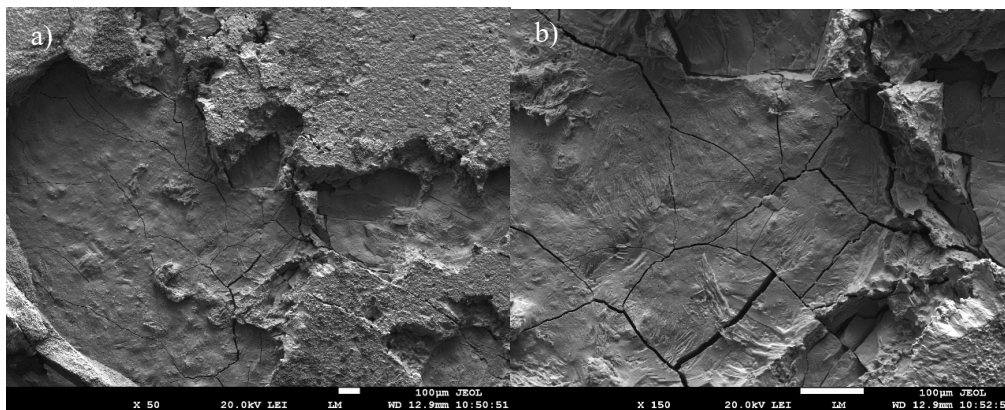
Fractured surface of soldered AlN/Zn5Al3Mg/Cu joint (a) magnification 50×, (b) magnification 150×.
